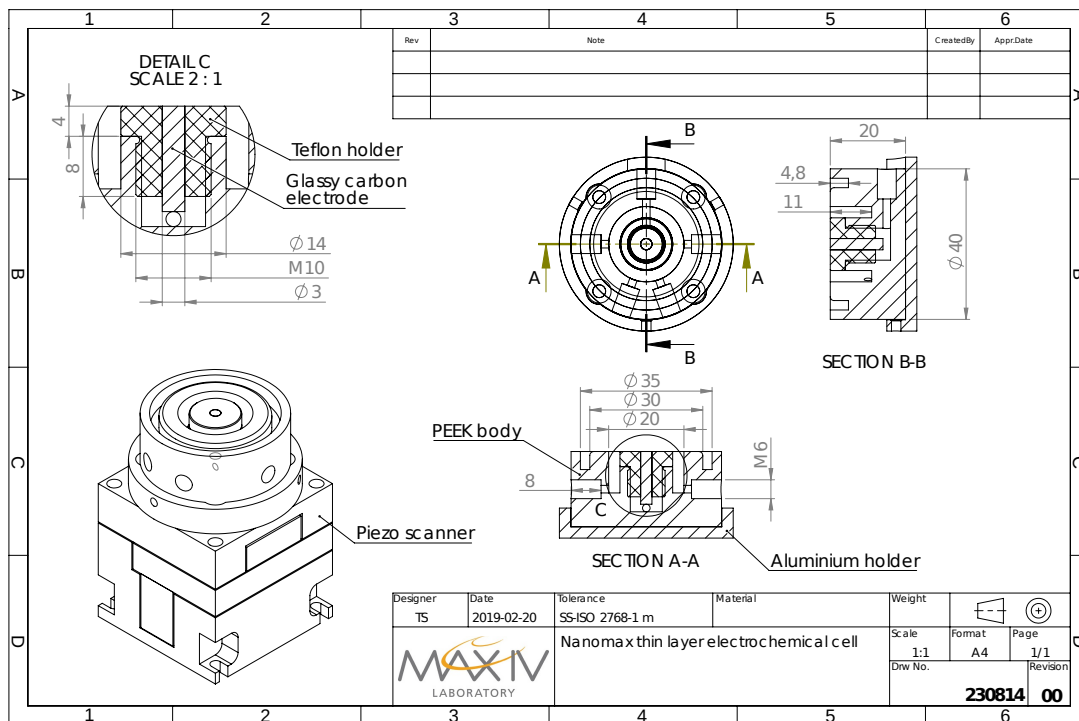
Technical drawing of the electrochemical cell, including its mounting on the piezo scanner. The cell body is made of PEEK and turned in one piece. The glassy carbon rod is held in a teflon holder, which threads into the PEEK body.
